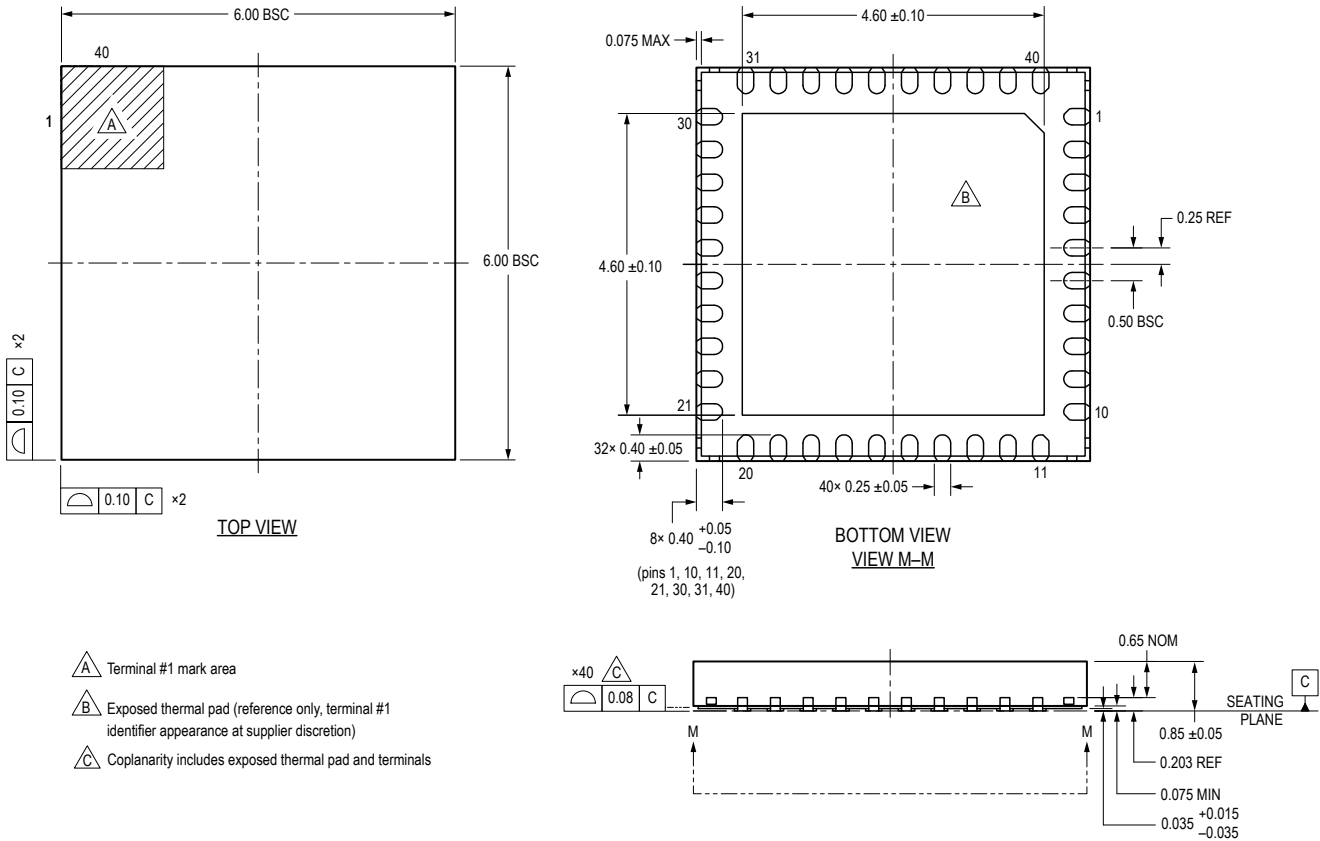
6 mm × 6 mm, 40-pin QFN with exposed power pad and wettable flank (suffix EV)
